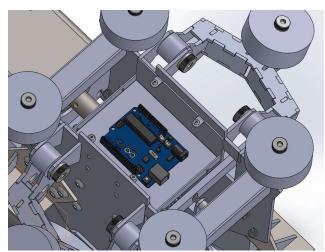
A CAD picture showing how the slave Arduino fits inside the sheet metal box.
